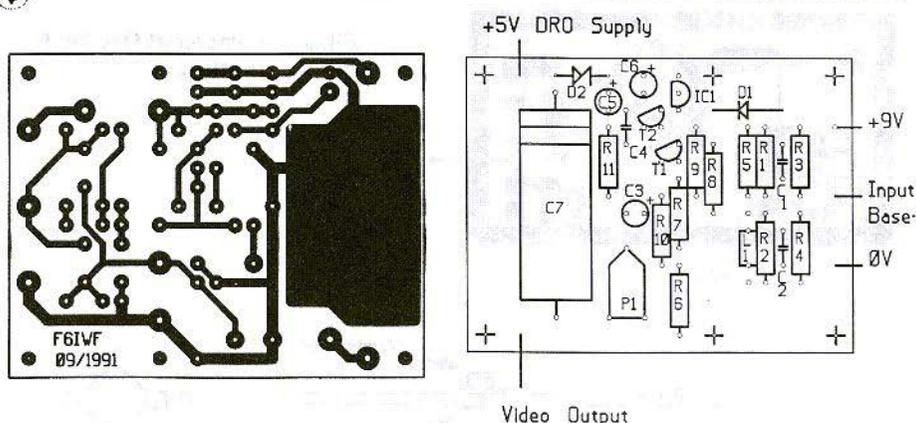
Modulator PCB Layout and Component Overlay (finished size: 56 x 43mm)
